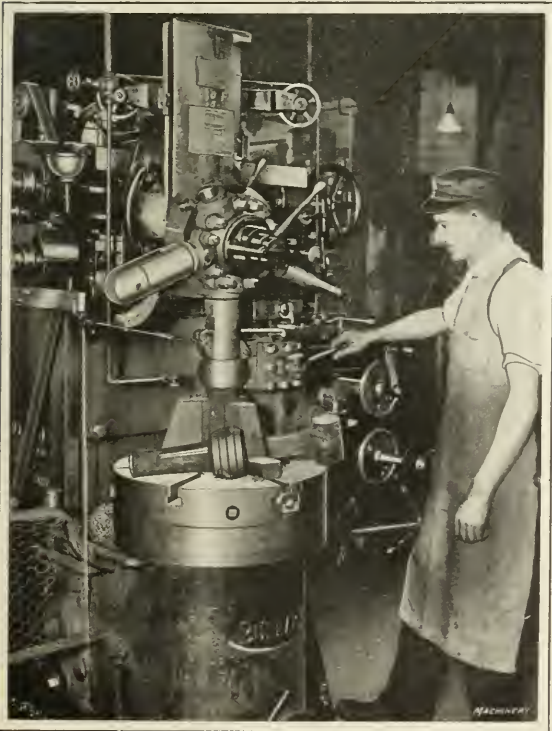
Bullard Vertical Turret Lathe tooled up for turning Ball of a Ball and Socket Joint
